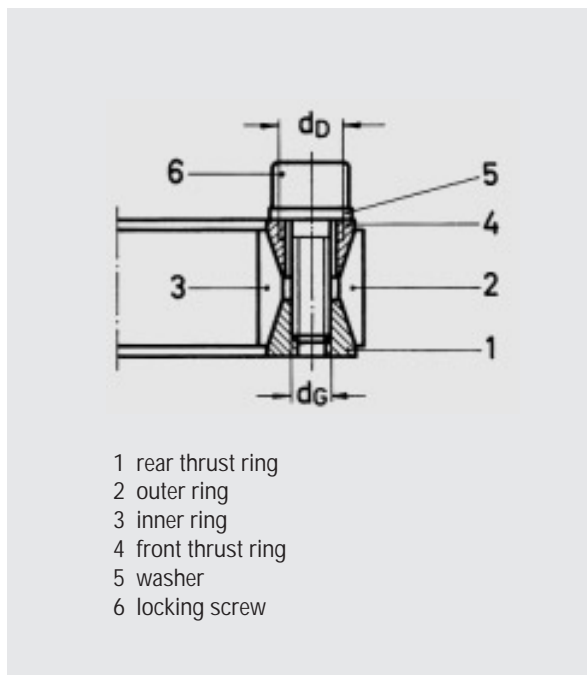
Locking Assembly RINGFEDER® RfN 7012. Designation of components.
